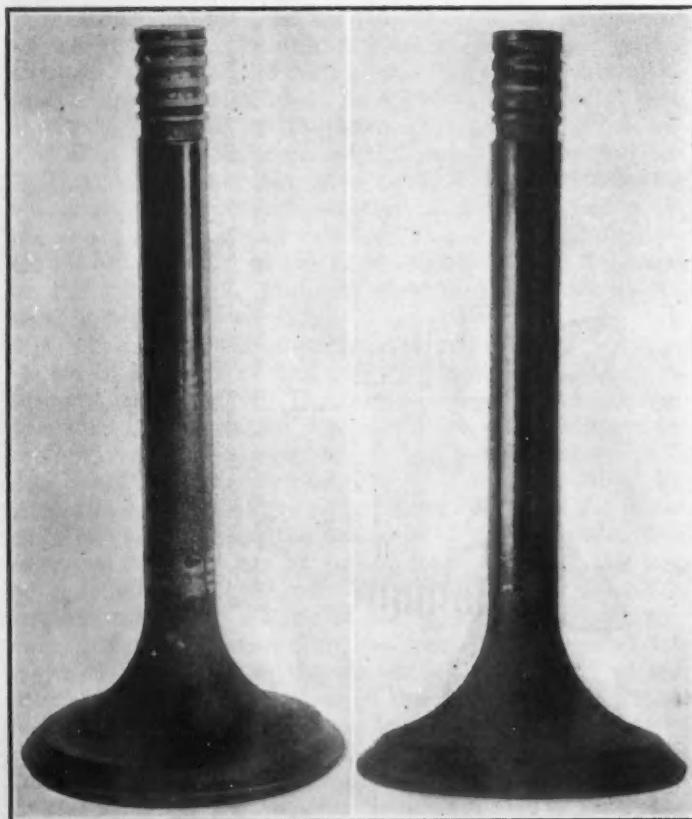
CONDITION OF EXHAUST-VALVES USED WITH THE TYPE J CYLINDER AFTER TEST RUNS WERE COMPLETED
